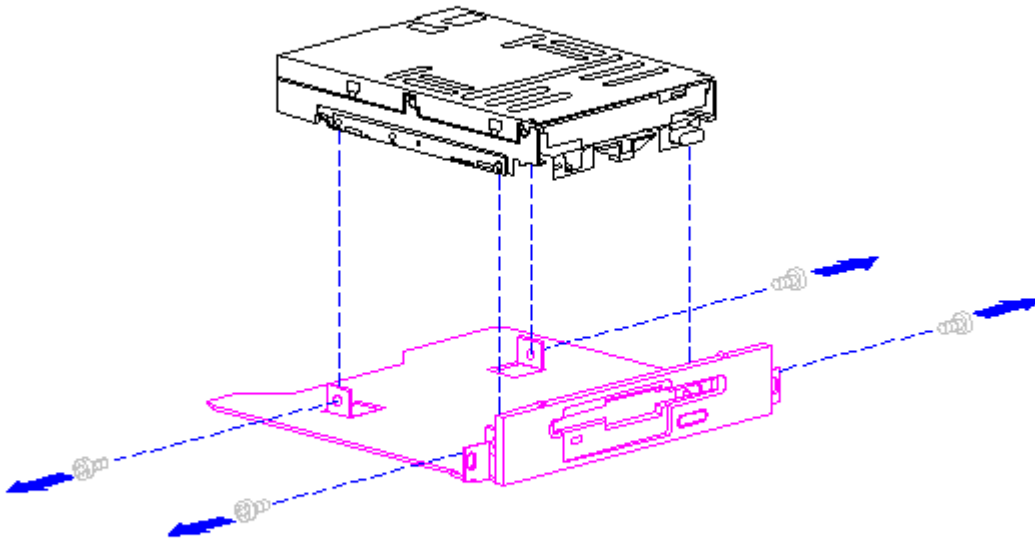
Removing the Mounting Bracket from the Diskette Drive
